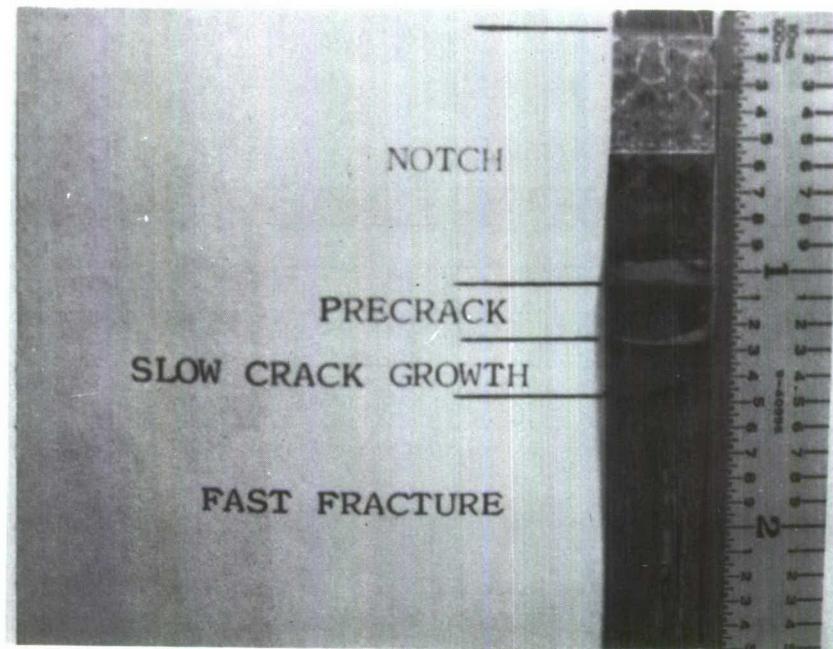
Fracture Surface of a Statically Loaded Rectangular DCB Crack Growth Specimen Tested in Distilled Water
